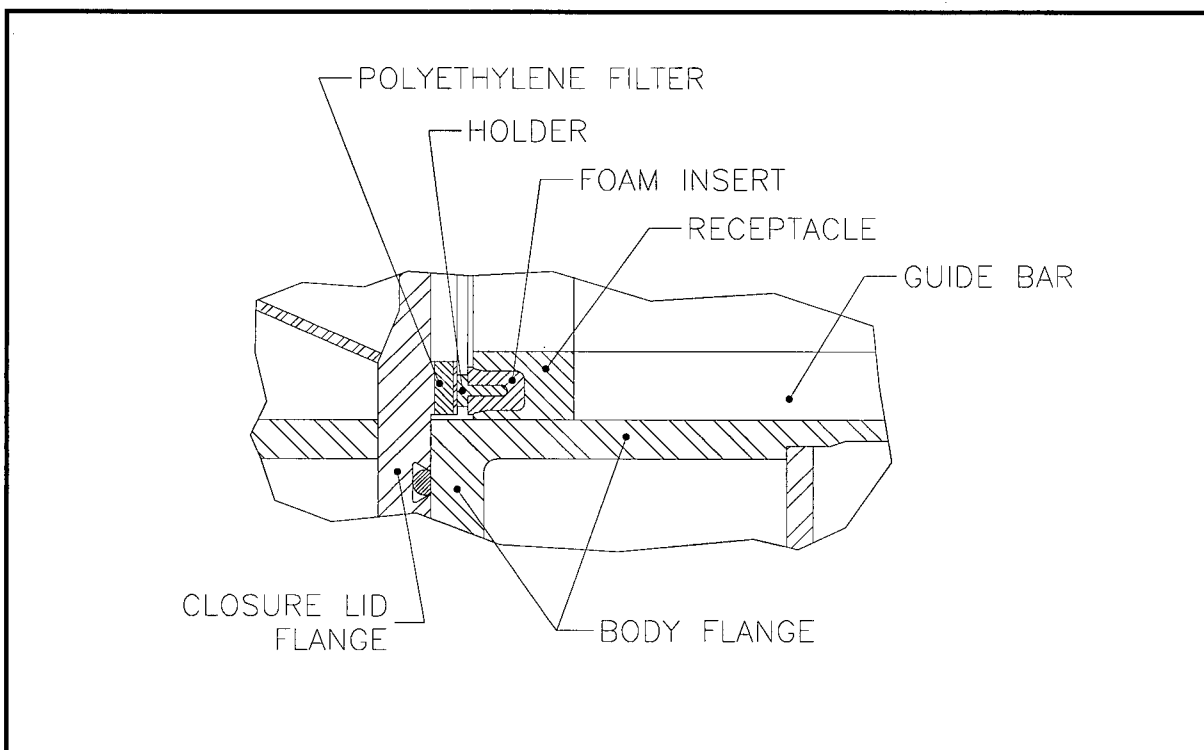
Debris Shield Cross Sectional View
